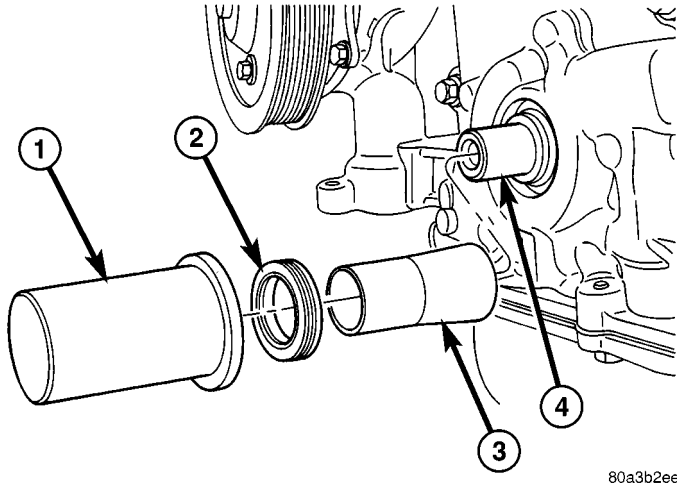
CRANKSHAFT FRONT SEAL INSTALLATION
